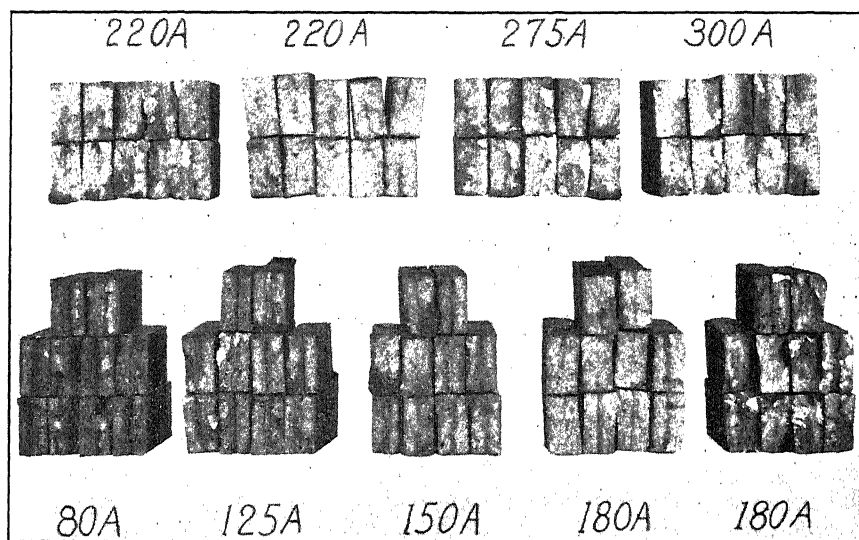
APPEARANCE OF WELDS WHEN TEST PIECES WERE BROKEN.
